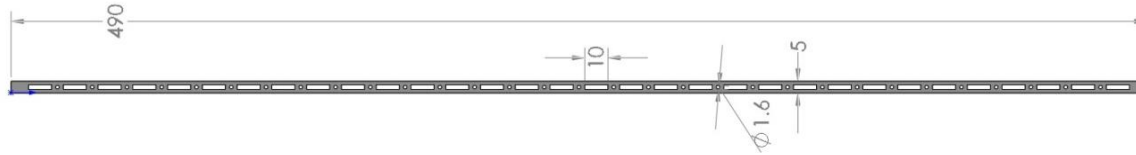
Top view and dimension of the plastic ribs (dimensions in mm).
